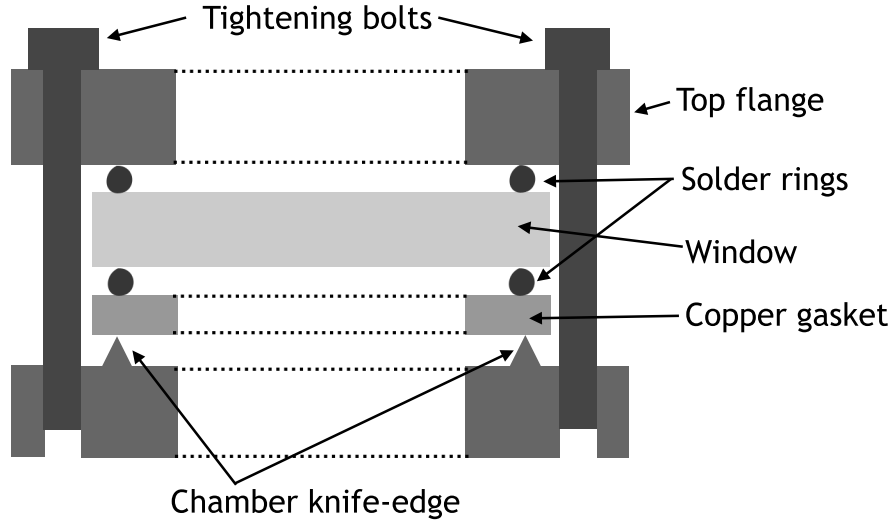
Schematic of home-made window seal. Rings of soft solder are placed between a top flange and glass window and between the window and a copper gasket. Tightening bolts which go through the top flange and screw into tapped holes in the chamber squeeze everything together; as a result, the copper gasket is driven into the chamber knife edge creating a vacuum seal, while the mashed lower solder ring creates a seal between the gasket and window. The upper solder ring acts as a cushion to prevent the window from being cracked by the steel top flange.
